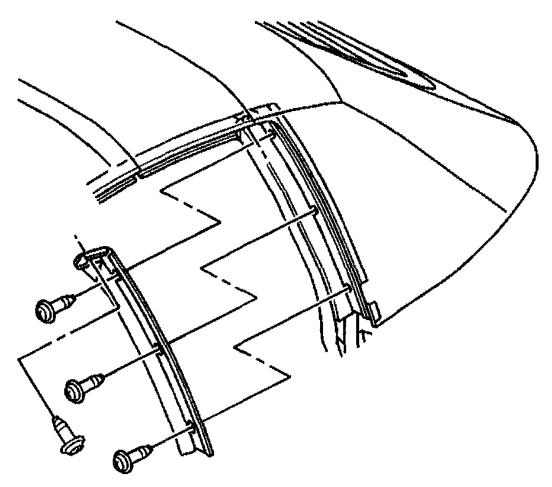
Installing Side Weatherstrip Screws Courtesy of GENERAL MOTORS CORP.
